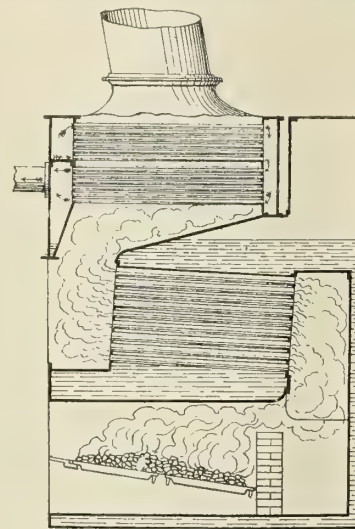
OLD-STYLE BEARDMORE SUPERHEATER.
